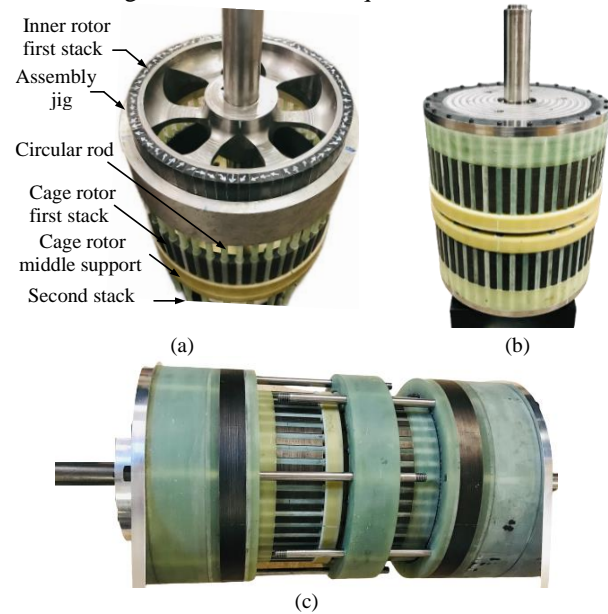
(a) Inserting inner rotor into the cage rotor, (b) two-stack inner-cage rotor fully assembled, (c) arrangement for sliding the outer rotors over the inner-cage sub-assembly.
